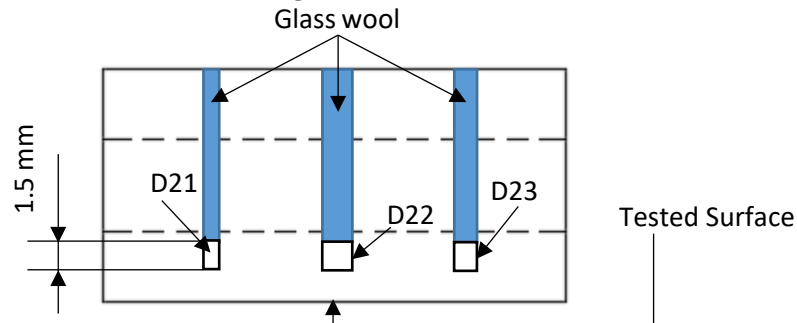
Sectional view of sample with Set – 2 defects with Glass Wool.
